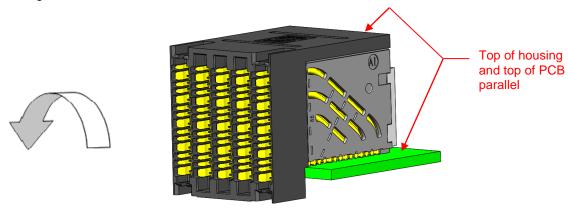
Connector Rotated Parallel to Top of PCB and EONs Aligned
